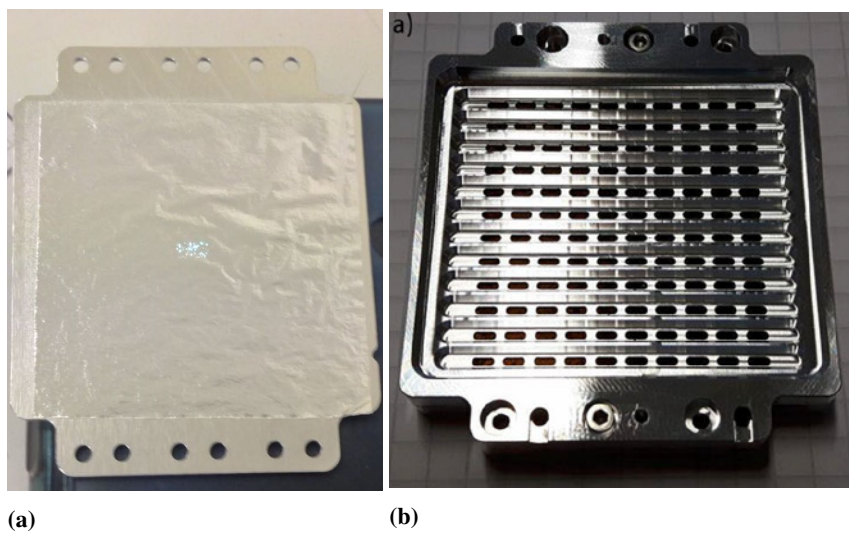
(a) Image of the foil holder with the attached thin Aluminum substrate; the centre of the foil is back illuminated and the light propagates through the micrometric holes. (b) Image of the DLT assembly.
